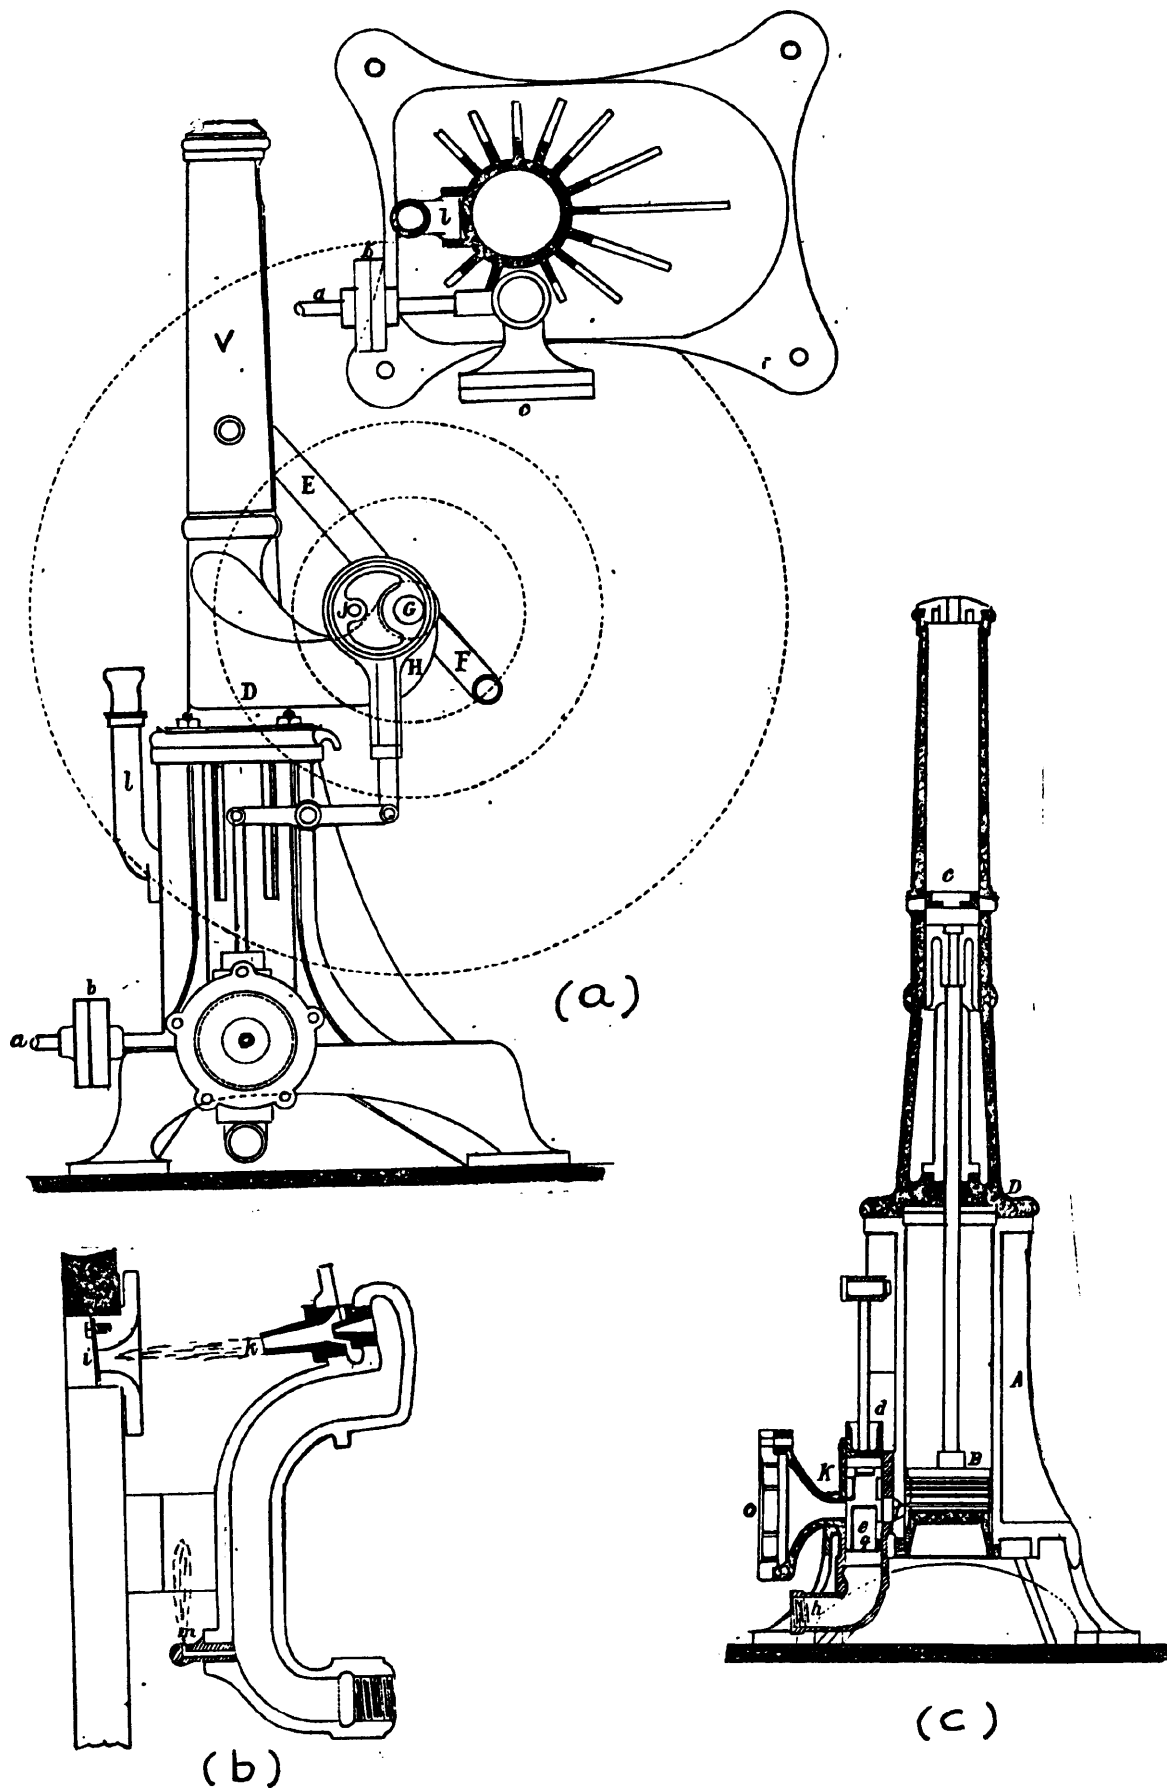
Sectioned views of the Bisschop engine manufactured by Messrs Andrews of Stockport from 1878.
